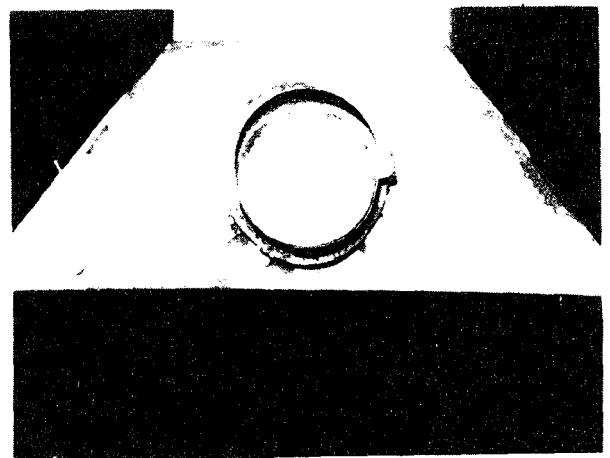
DAMAGE TO TRAILER SUPPORT FOOT AFTER THIRD TEST RUN
